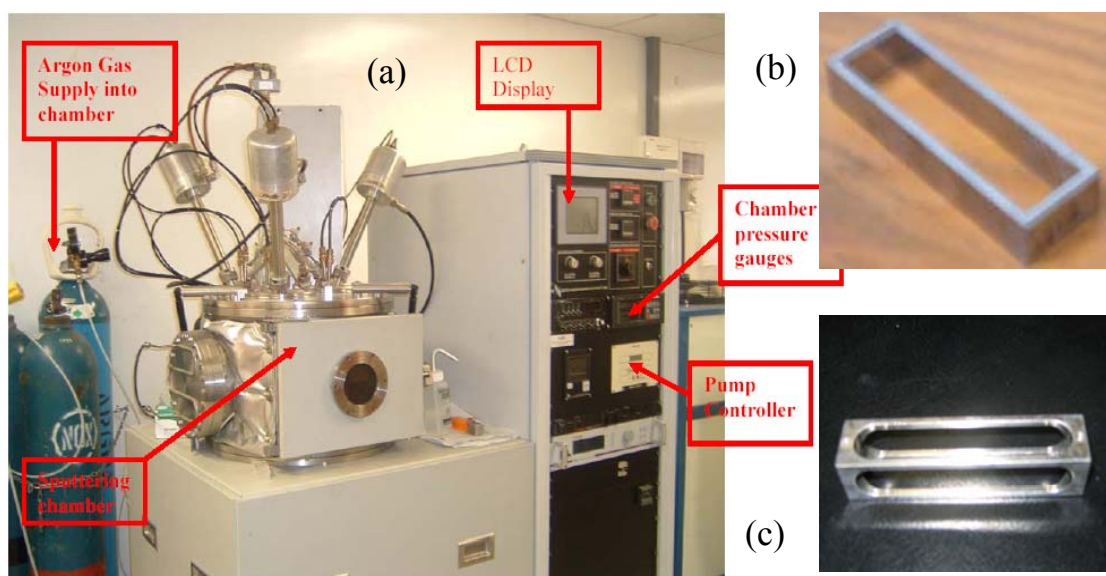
Photographs showing (a) The Denton Discovery 80 system; (b) wire fixture for 180° rotation; (c) wire fixture for 90° rotation.
